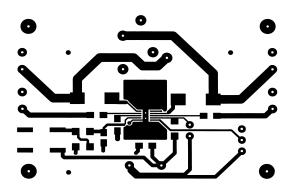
Recommended LD PC Board Layout: TOP Top Layer
